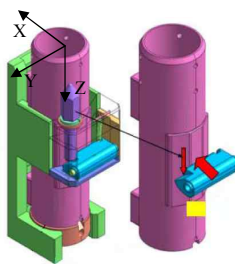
Clamping Mechanism between the Damper Cylinder and the Lower Mount Bracket.
